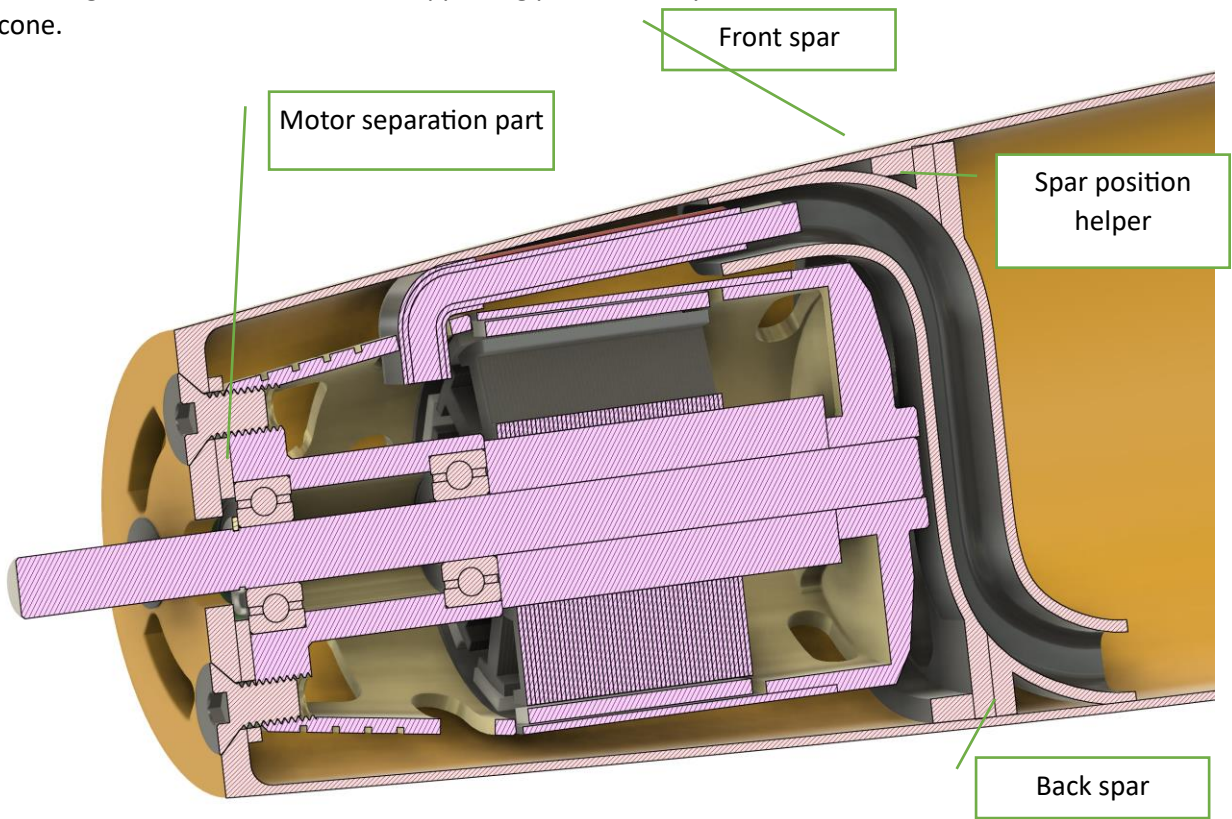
Prestige PK<sup>2</sup> pro nose cone with assembled motor and supporting parts, spar, cable
